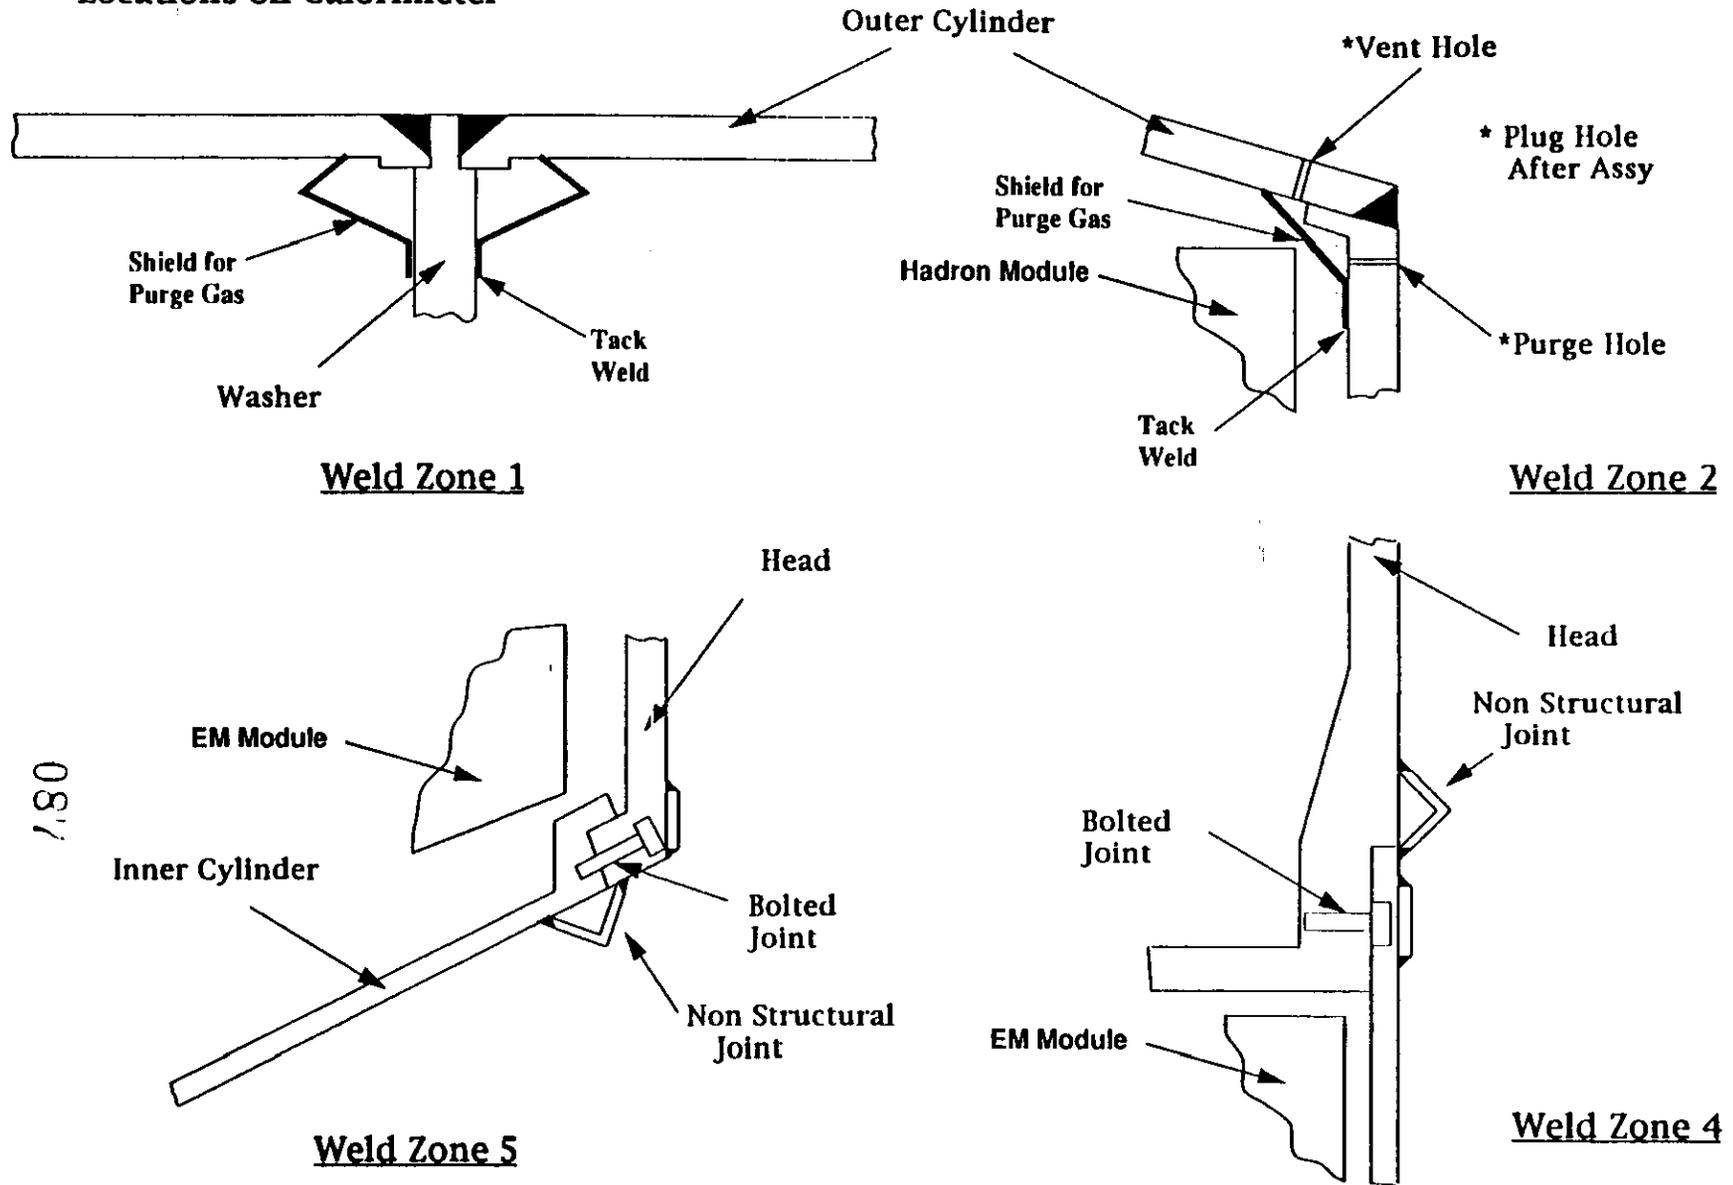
Weld Joints Shielded & Purged During Assembly of Barrel EM Calorimeter
